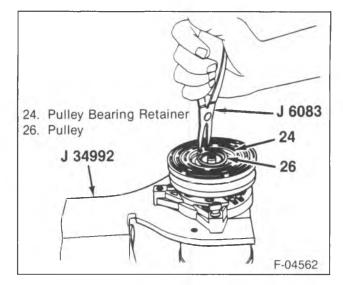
Removing the Pulley Rotor and Bearing Assembly Retaining Ring
